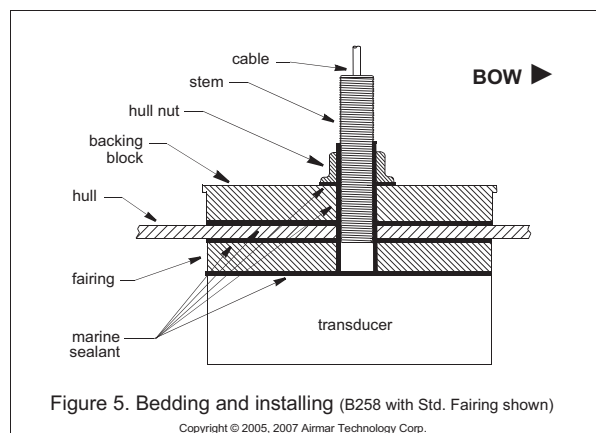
Bedding and installing (B258 with Std. Fairing shown)
